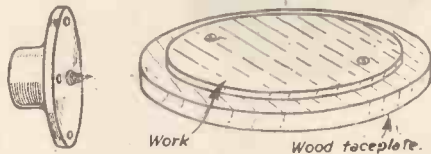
(Left) In this type of faceplate a taper screw is attached.
